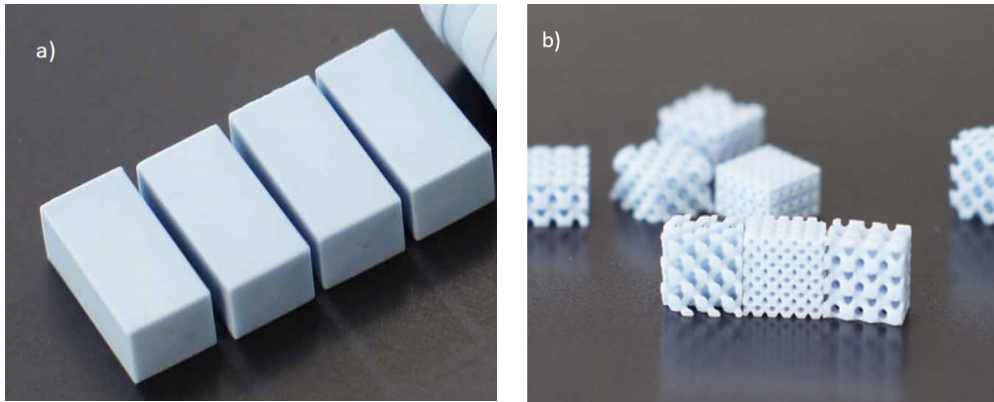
Mechanical test specimens: a) hardness solid specimens, b) compression lattice structure specimens
